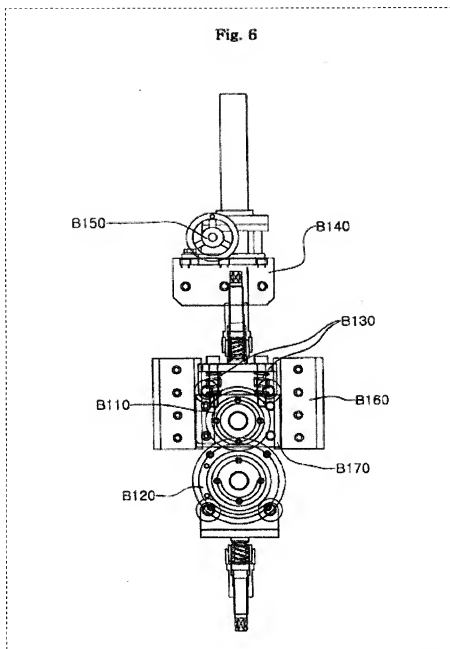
, reproduced below, shows this configuration of upper and lower rollers in more detail:
